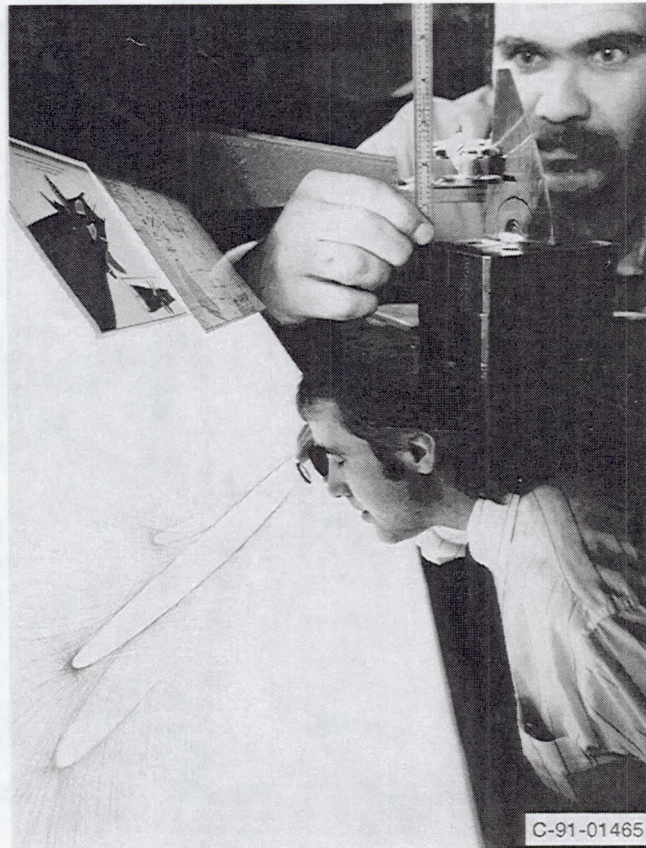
Blade in inspection machine, upper right. Cross-sectional tracing being compared with Mylar master, lower left.
